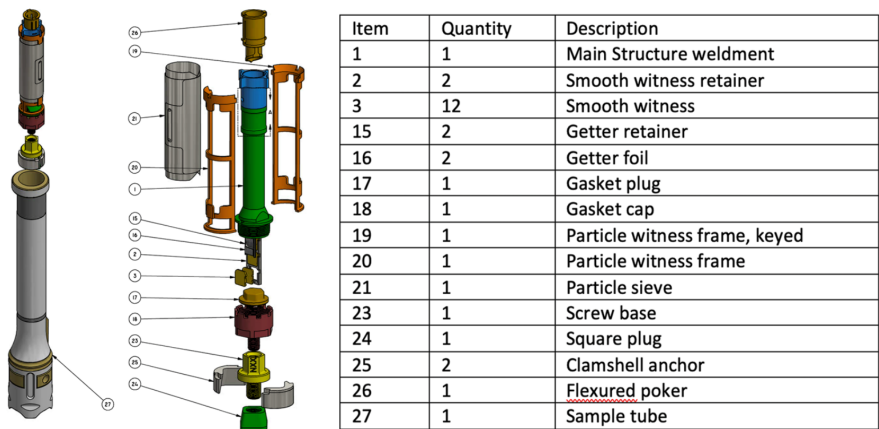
Witness Assembly is installed into a Sample Tube (left). Exploded view shows the major component assemblies: a) an anchoring mechanism to retain the assembly within the Sample Tube; b) hermetically sealed compartment (green); c) particle trap, consisting of perforated fine sieves wrapped around the sealed compartment, and d) a puncture mechanism to open the hermetic compartment. Inside the sealed compartment are 2 getter foils and 12 individual polished gold witnesses
